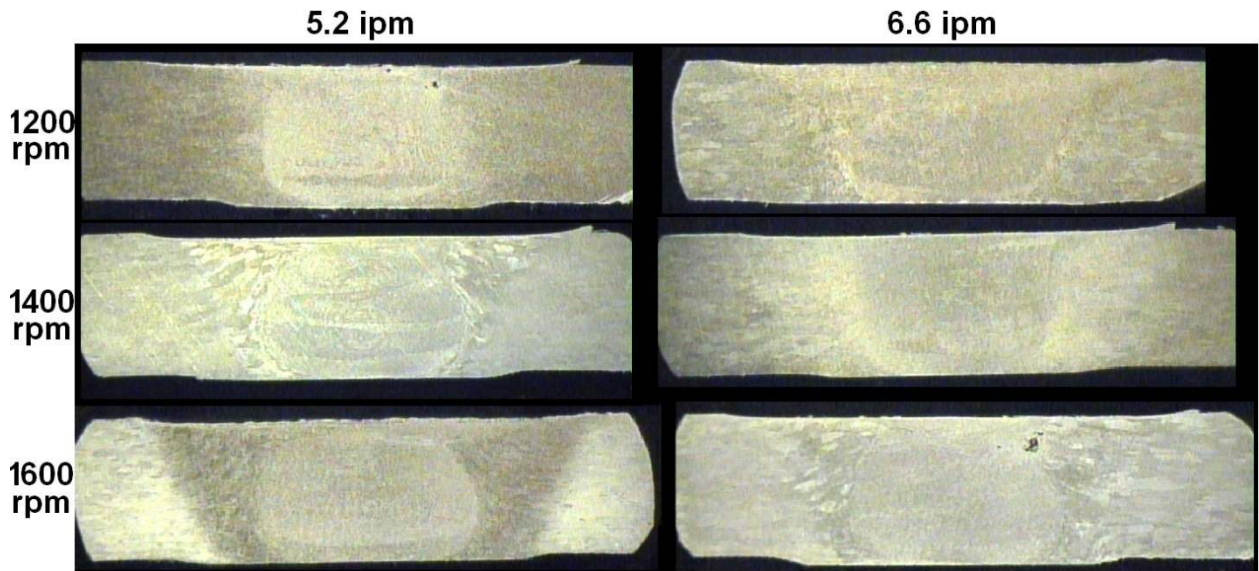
Lateral macrosection view of welds made at 5.2 and 6.6ipm using a 5/8" dia. scrolled shoulder, 0.236"(6mm) diameter threaded probe tool.
